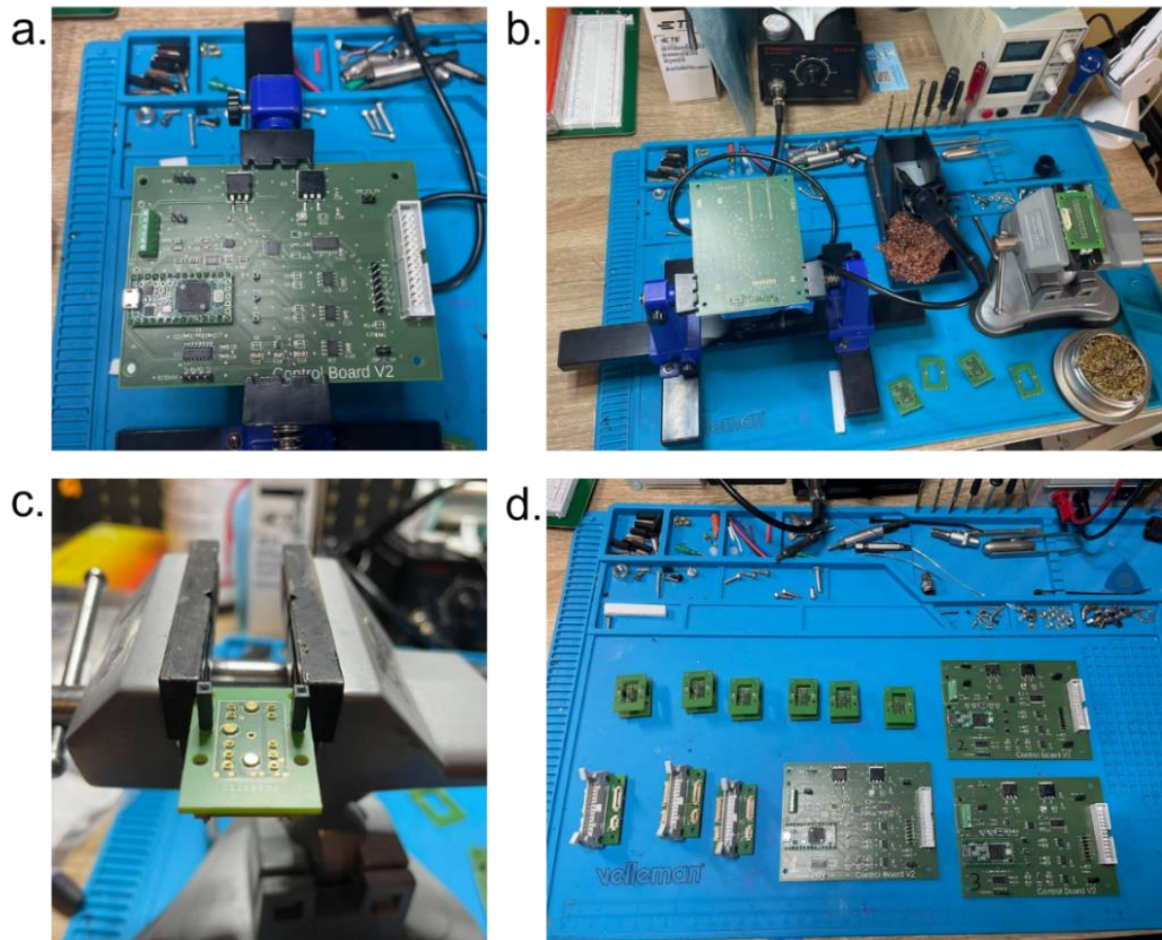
Through hole components hand soldered to PCBs (a) THT components solder to main control board d.) Soldering components to boards (c) THT components soldered to CMOS mounting boards d.) Completed PCBs SMD and THT components soldered.
